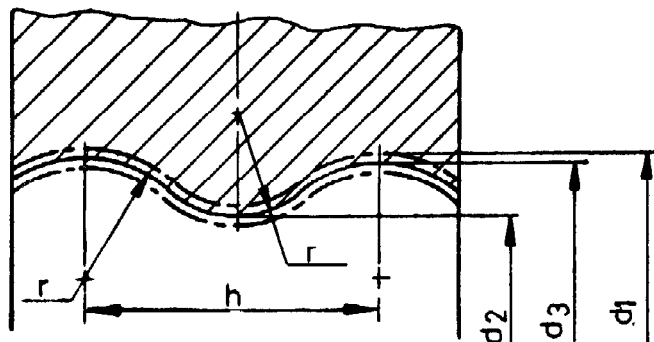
INTERNAL GAUGE FOR EXTERNAL THREAD
